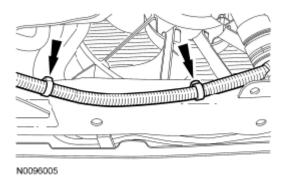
Locating EPAS System Wiring Harness Pin-Type Retainer Courtesy of FORD MOTOR CO.
